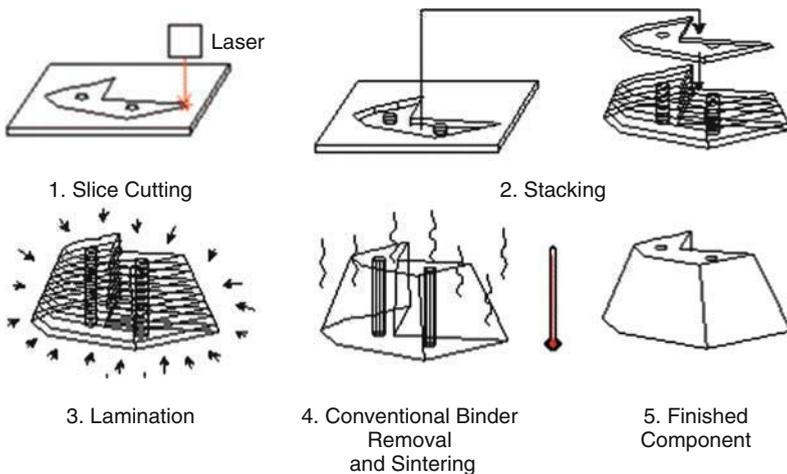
CAM-LEM process (Courtesy CAM-LEM, Inc.)
